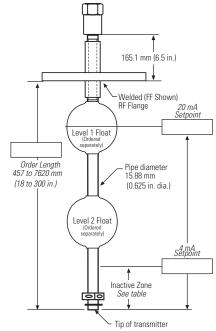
Rigid Sensor Pipe with Welded RF flange
